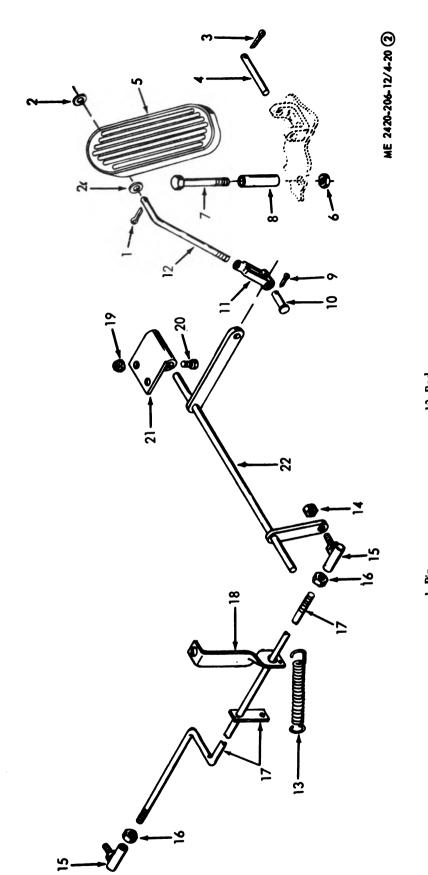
Accelerator pedal and linkage, removal, disassembly, reassembly, and installation (sheet 1 of 2).
